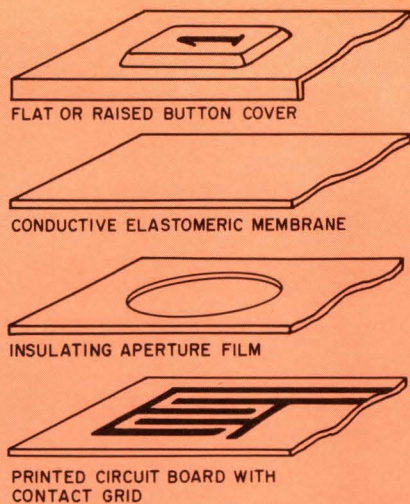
This exploded view shows the novel construction of a Flex Key elastomeric keyswitch.
